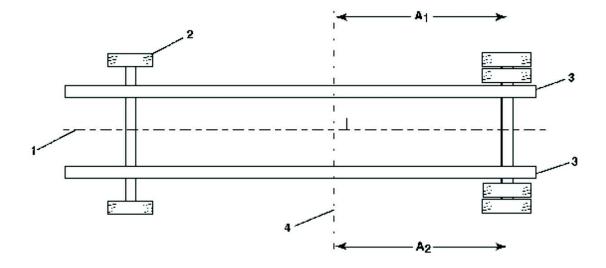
4 x 2 Chassis — A1 = A2 with a Tolerance of No More Than 1/8 Inch (3.3 MM)
